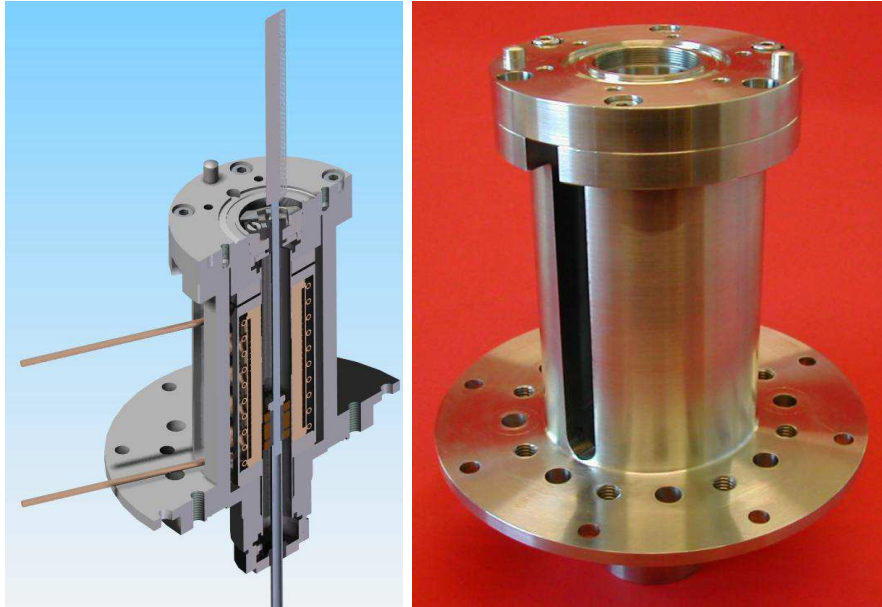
(left) Core body assembly with welded vacuum tube, (right) core tube body with upper flange assembled on top with fasteners and taper dowels.
